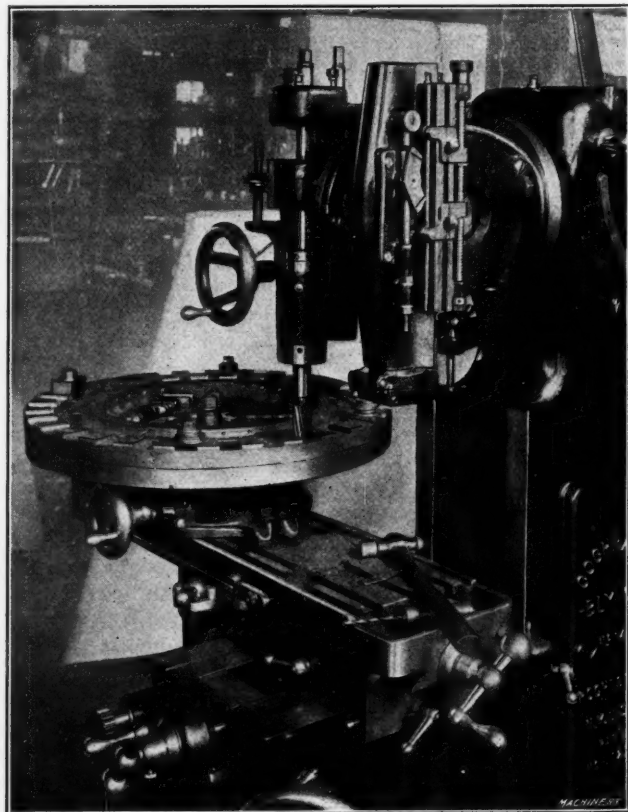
Milling Alternate Pads to a Depth of 1-32 inch
